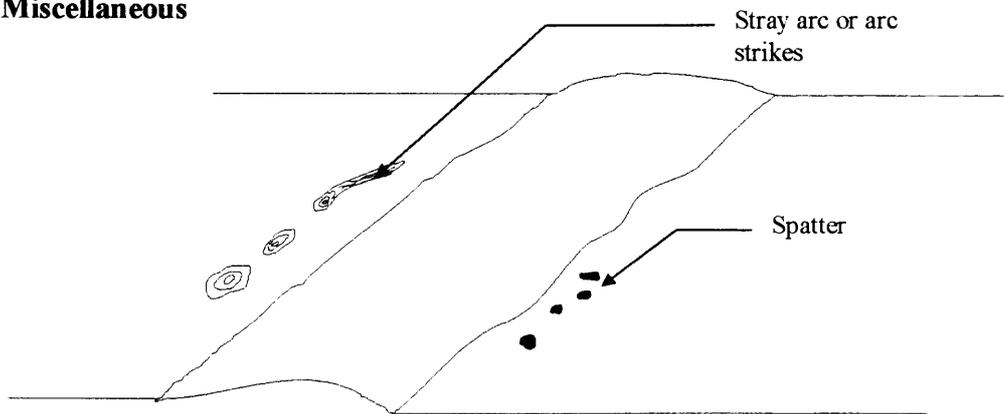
Weld Defects and Locations according to BS 499
